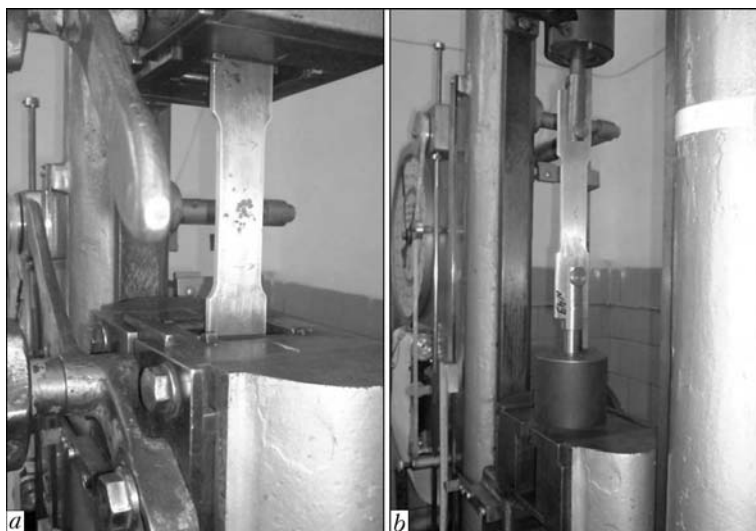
Appearance of assemblies of fastening of specimens in TsDM-10 machine using wedge-type grips (*a*) and pins connected with II-shaped cramps (*b*)
